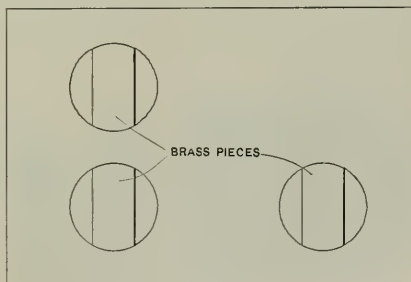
Cored Holes with Inserted Brass Pieces for Centers.
